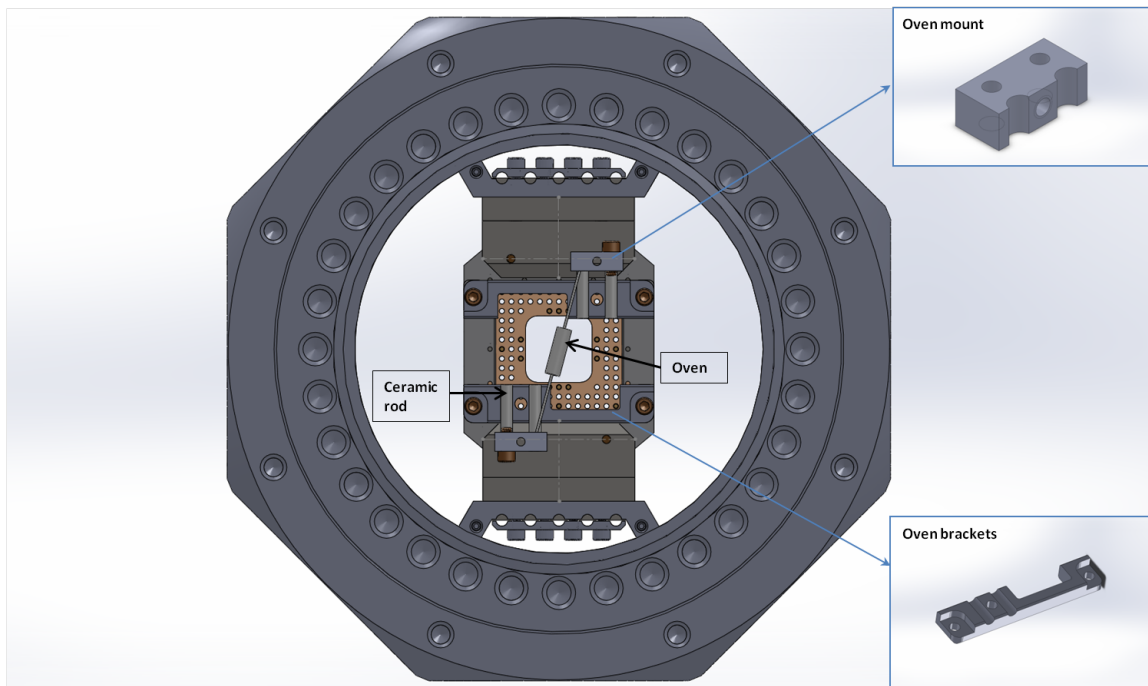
3D CAD drawings of the back side of the chamber components. Oven, oven mounts, and oven brackets are shown.
